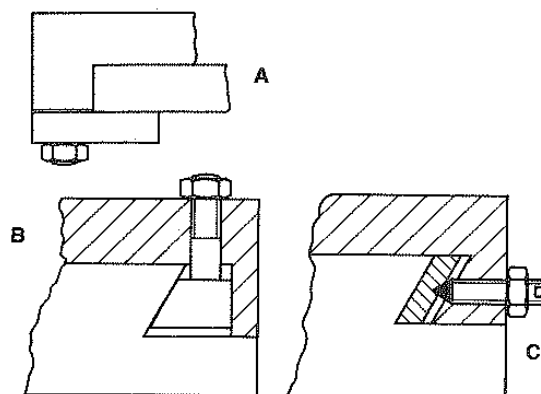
(a) Taking up wear in flat machine slide (b) and (c) Taking up wear in dovetail slides
